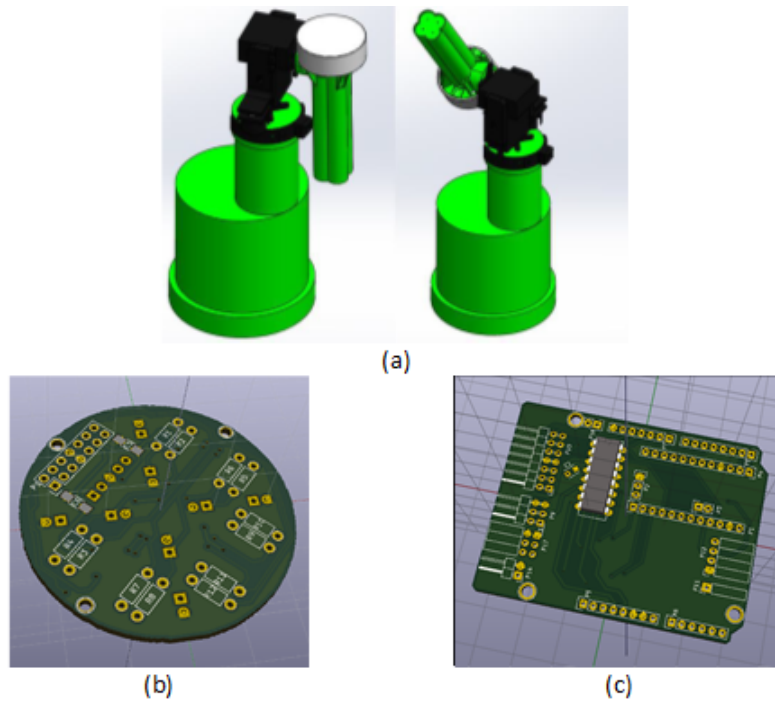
Design of different components of the instrument. (a) CAD view of the instrument. (b) Sensor PCB design and (c) Energy and robotic arm PCB.
